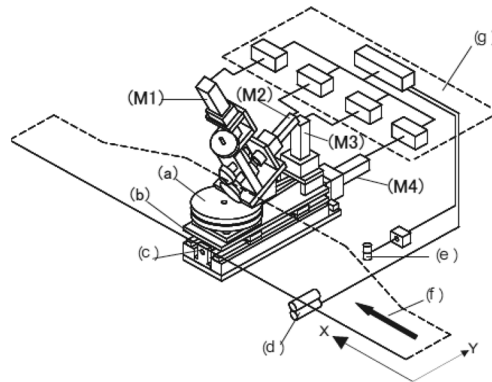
Flexible roll forming mill prototype. Servomotors: (M1) for light rolling; (M2) for driving rolls; (M3) for rotating turn table; and (M4) for translating base table. (a) Turn table. (b) Base table. (c) Guide actuator. (d) Rotary encoder. (e) Linear encoder. (f) Blank sheet. (g) Controller. Source: Ref 10.19, 10.20
